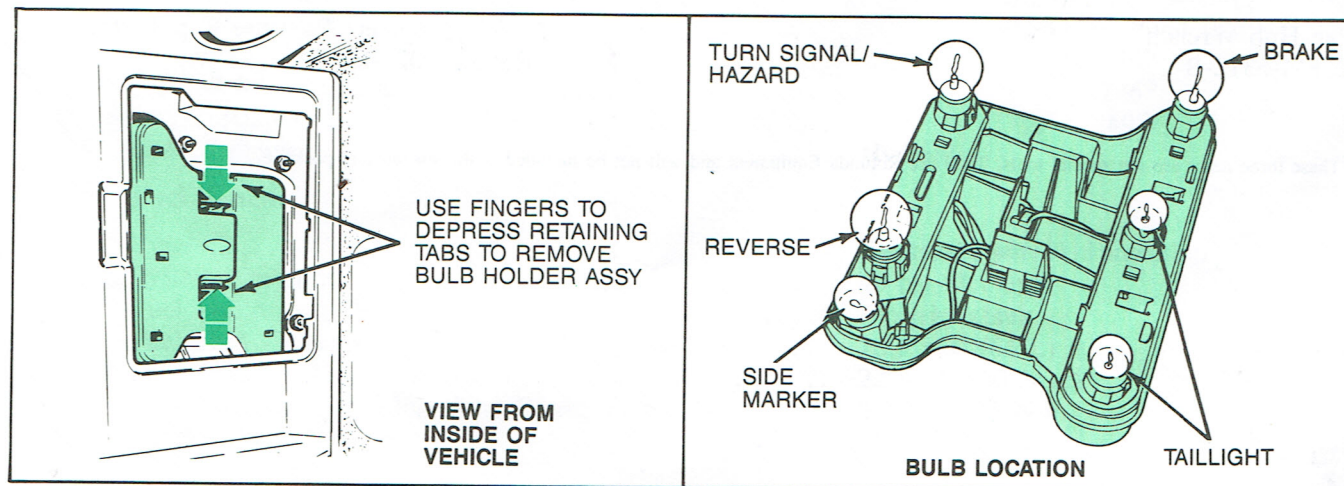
, Bulb Holder Assembly Location and Bulb Identification
